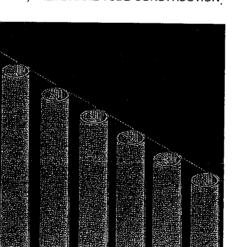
FIG. C) WATER-COOLED AND WELDED WALLS
